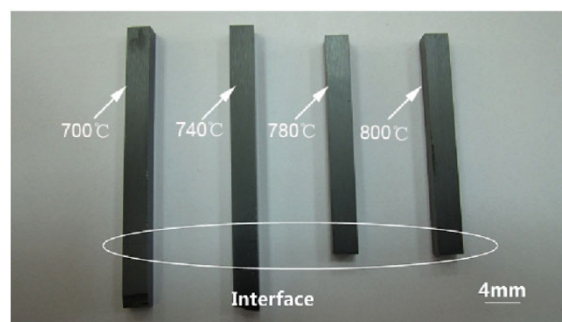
Optical image of fracture path for the SiC/SiC joints.
